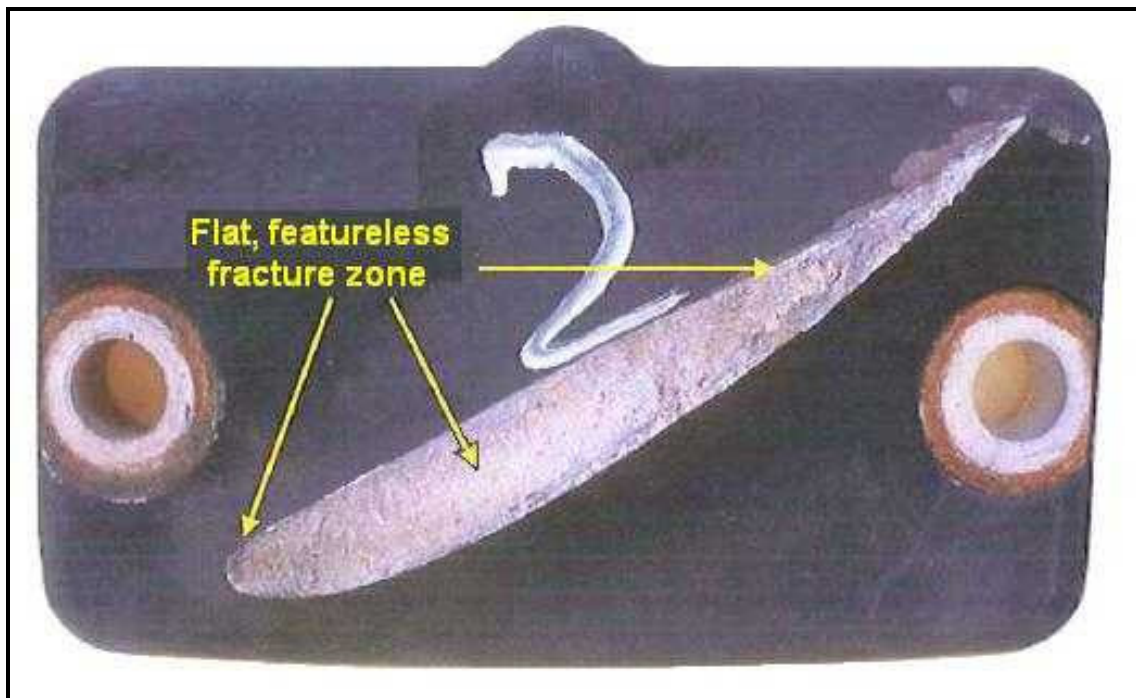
The fracture surface of the leading blade - note the flat featureless zone (fatigue crack) through to fibrous ductile fracture at the trailing edge
